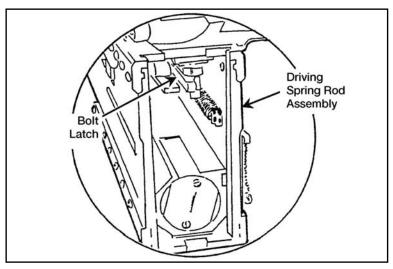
Removal of the driving spring rod assembly
